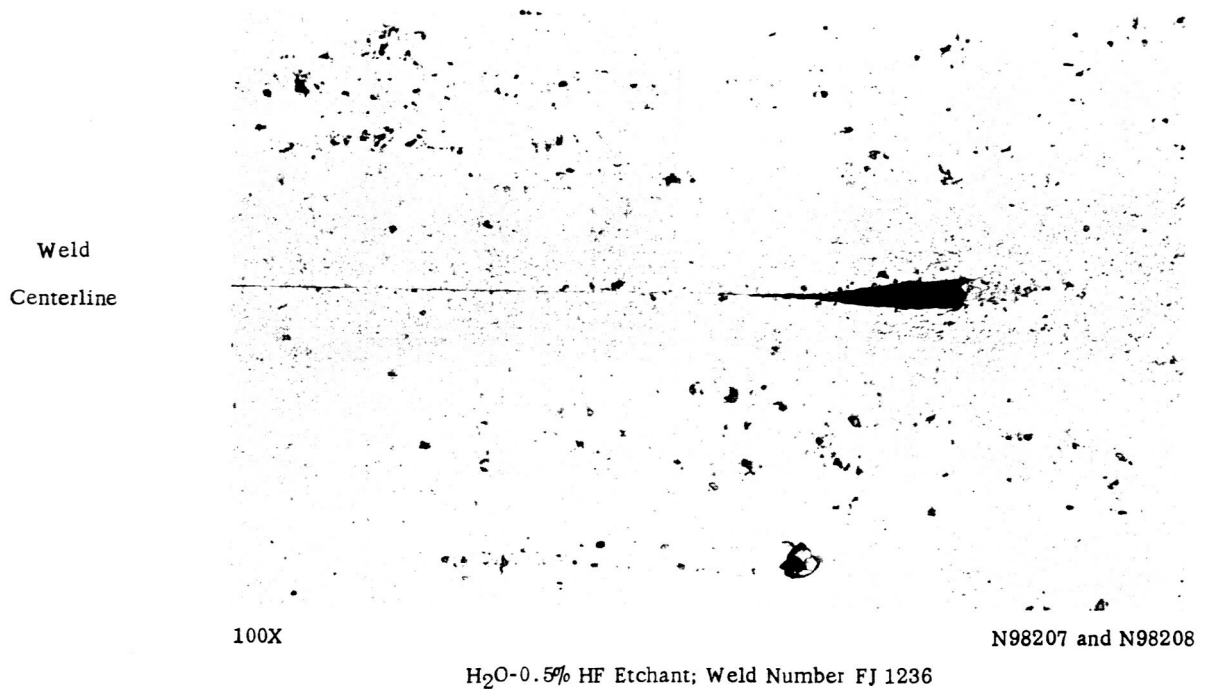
WELD DEFECT ATTRIBUTED TO ARCING IN A HIGH-FREQUENCY RESISTANCE WELD IN 0.093-INCH-THICK AA5456-H343 ALUMINUM ALLOY
